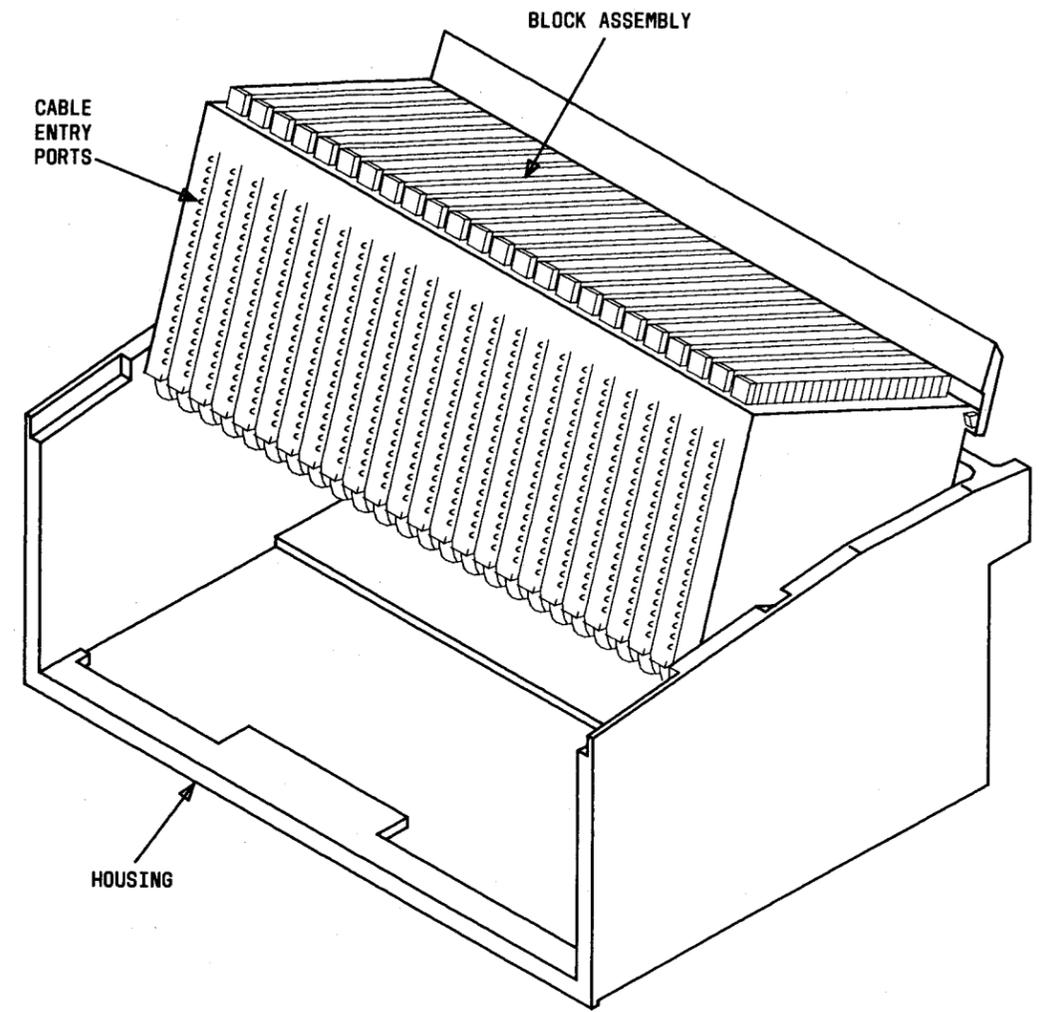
Connecting Block Assembly—Rotated Upward to Show Cable Entry Ports
